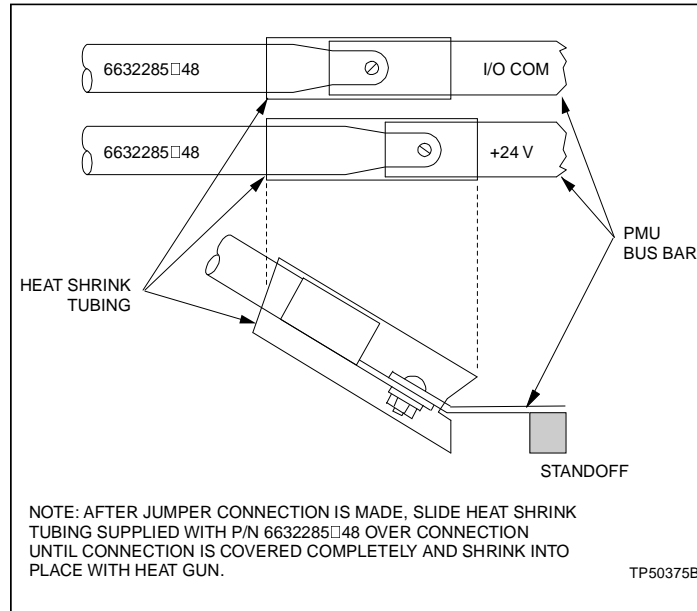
Heat Shrink Tubing for 24 VDC Connection
